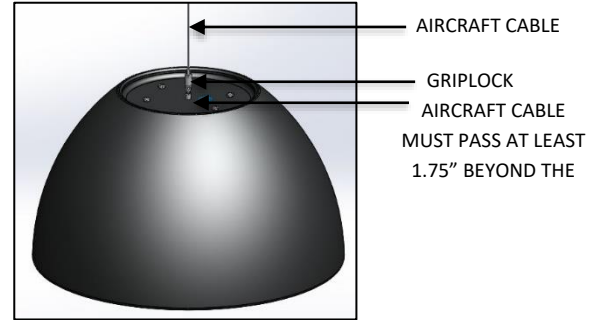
AIRCRAFT CABLE INSTALLATION
